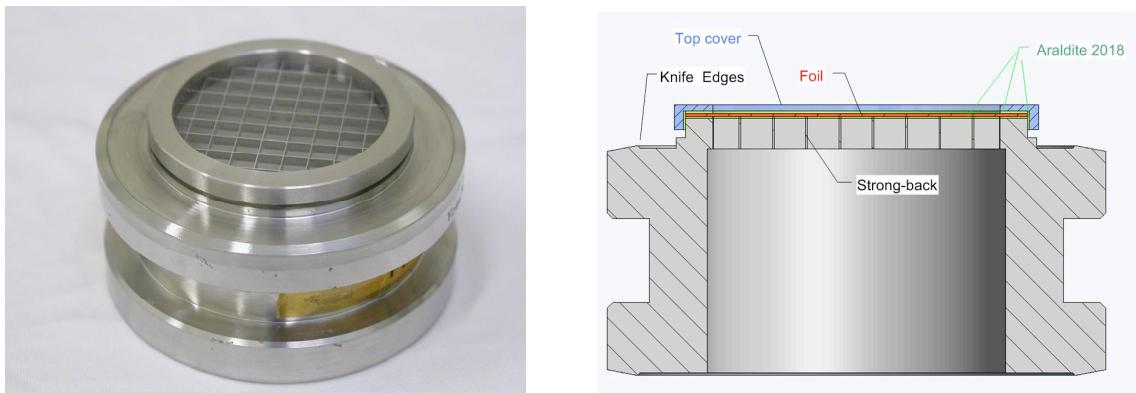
Window mounted on CF63 flange: photograph (left); cross section (right).
